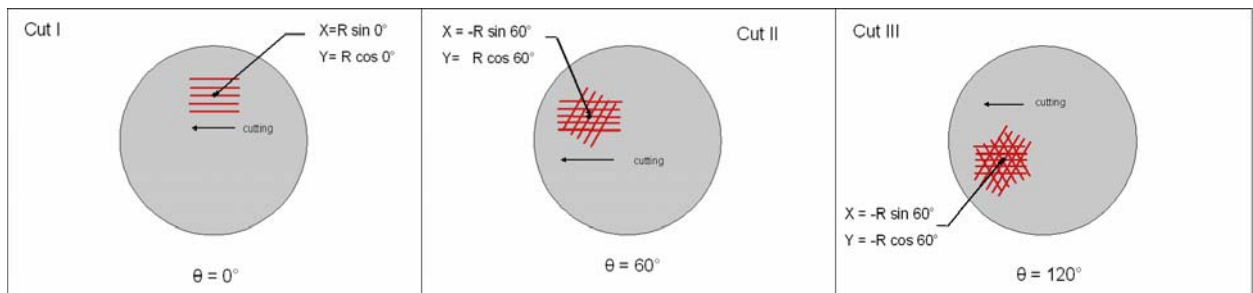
Making trihedrons by rotating spindle 60° between each set of cuts.
